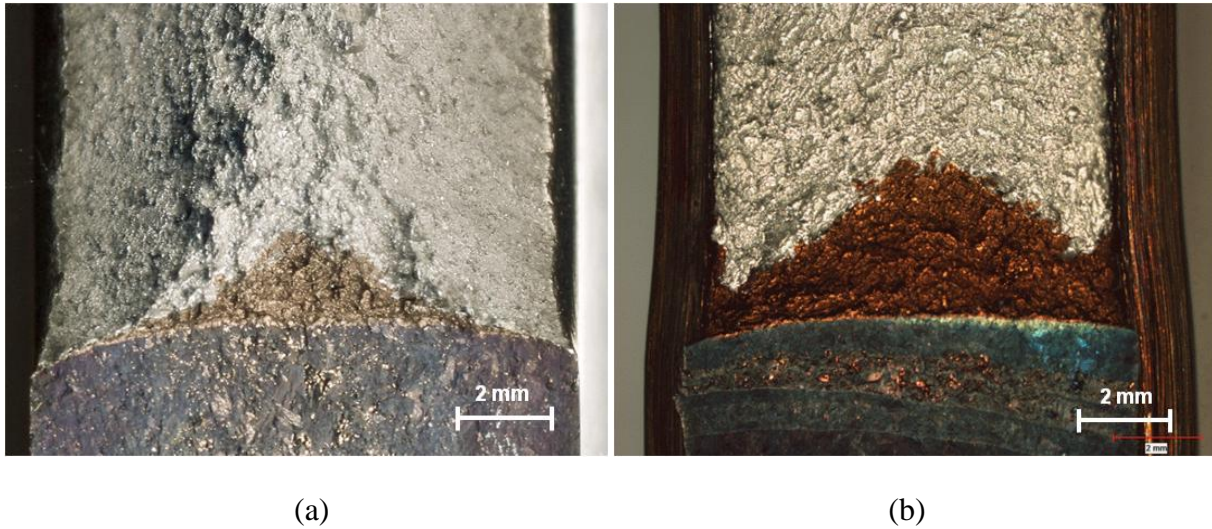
Fracture surfaces of 12.7 mm thick specimens: (a) smooth specimen, and (b) side-grooved specimen [81]
